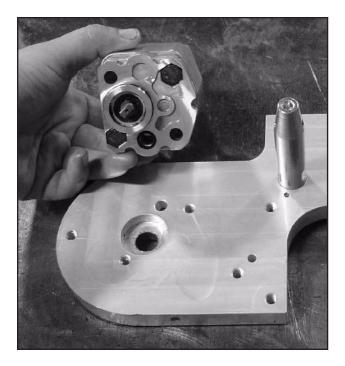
Replace o-rings and install Pump Assembly to Base Plate. Use a 6mm allen wrench to torque the two M8-1.25p x 80mm allen head bolts to 105 in. lbs.
